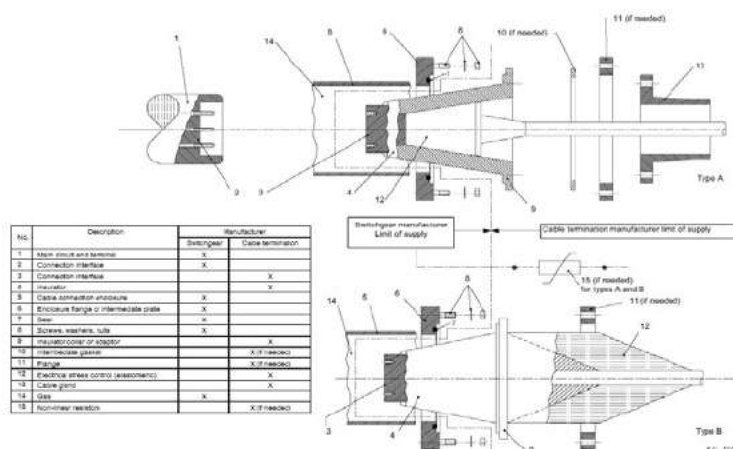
Dry-type cable connection assembly – Typical arrangement
